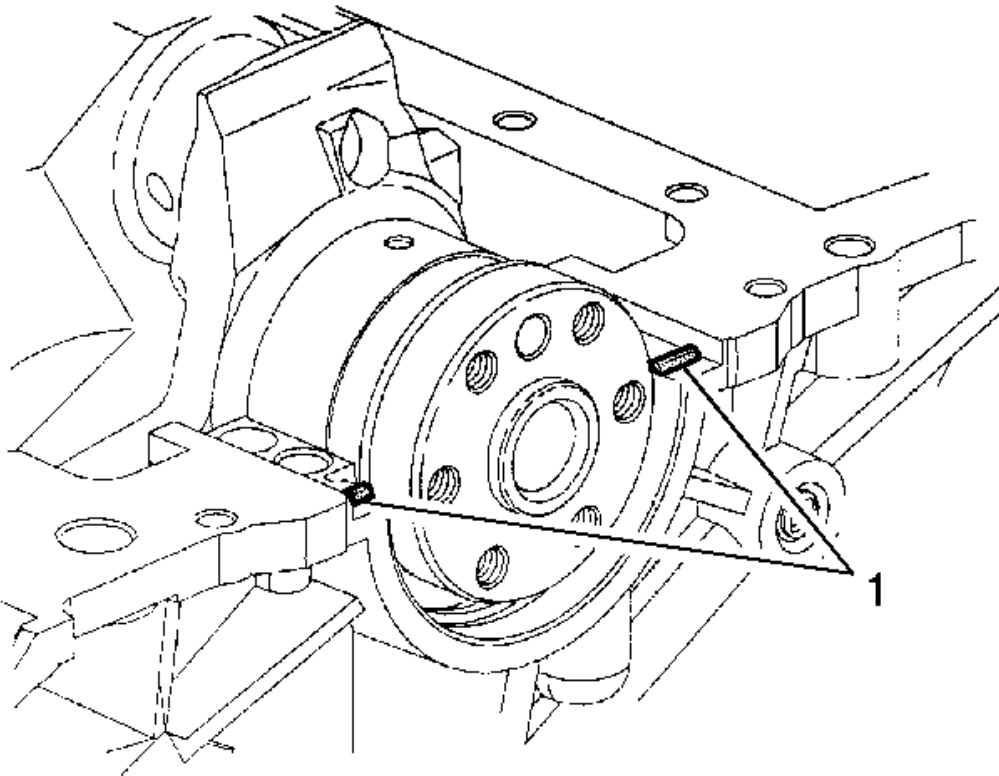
Applying Sealer To #4 Crankshaft Main Bearing Cap Sealing Surface
